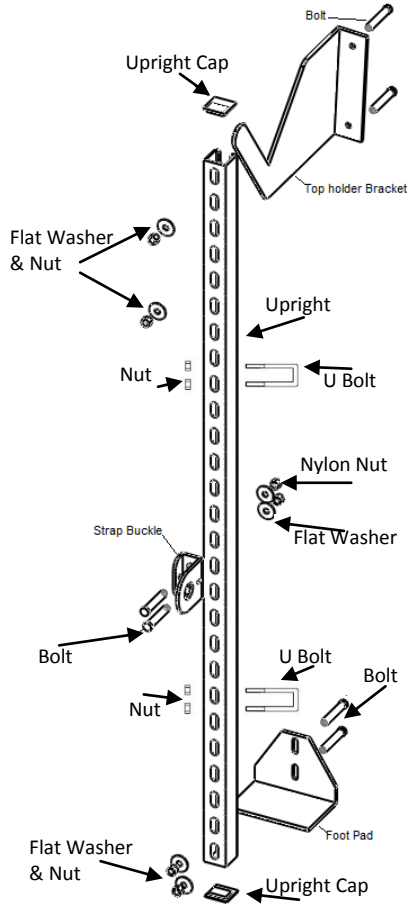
Rio Bar & Tube Handler Attachment assembly
